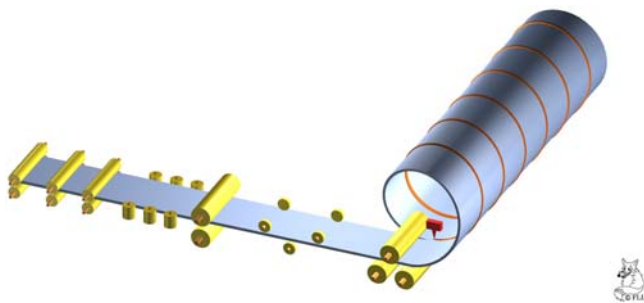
Forming spiral-weld pipe.
